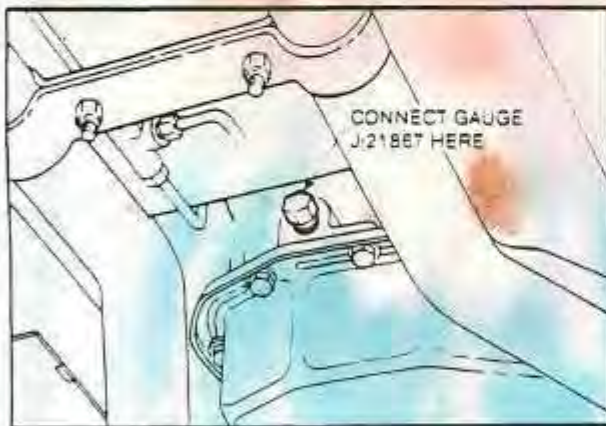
CHECKING TRANSMISSION FLUID PRESSURE
